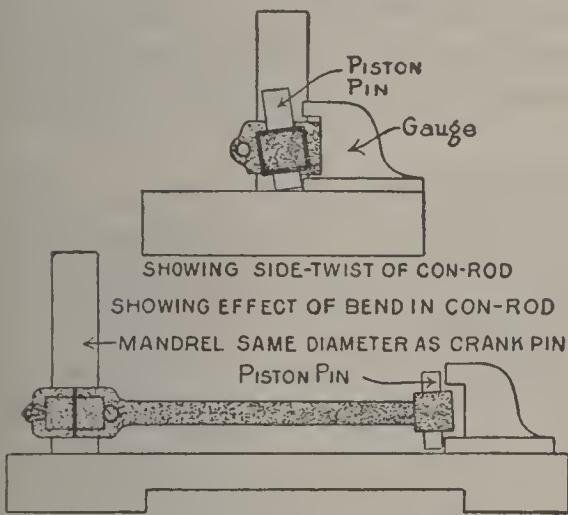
TESTING PISTON PIN AND ROD ALIGNMENT
